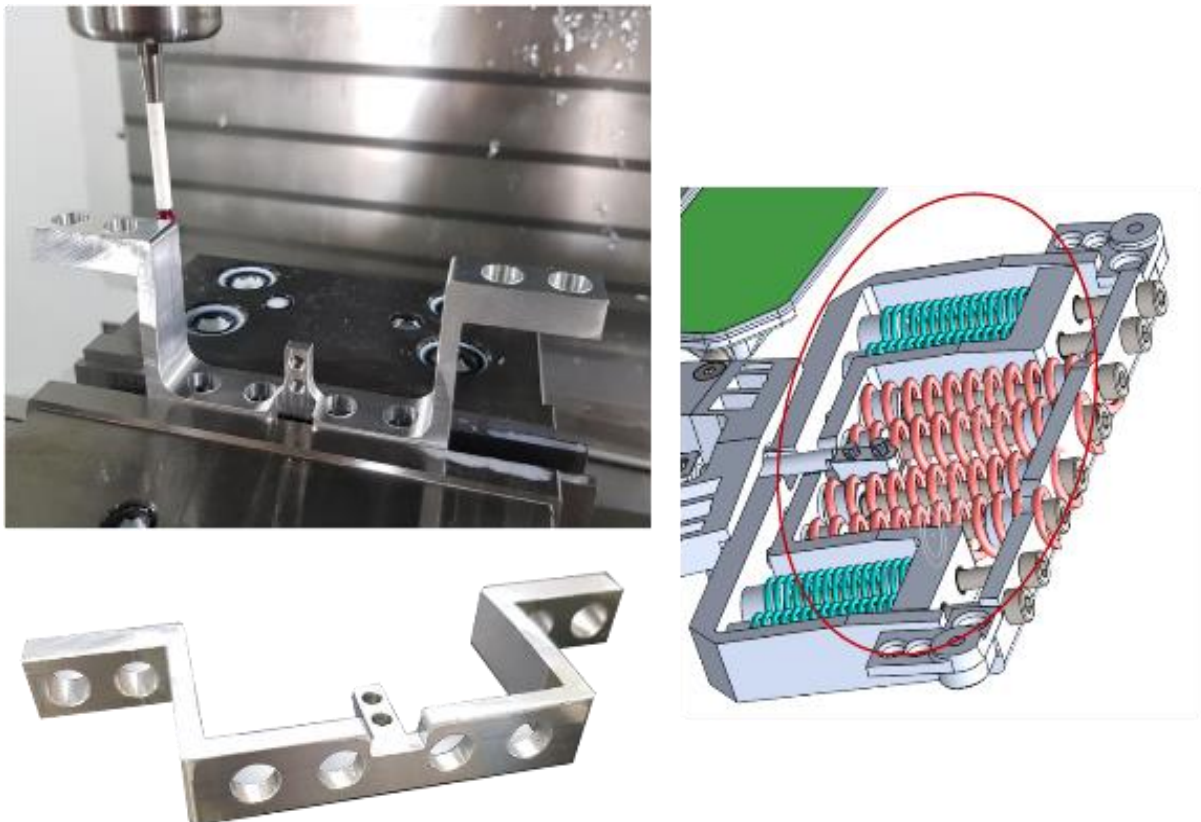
CNC manufacturing of the spring assembly frame pt. 2.
